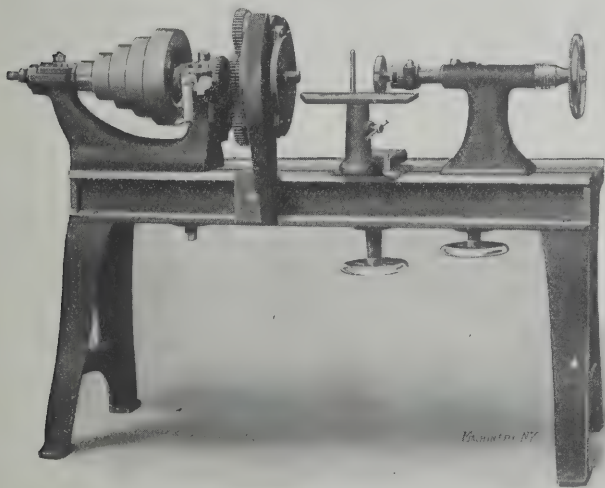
Elliptical Chuck mounted on Spinning Lathe
